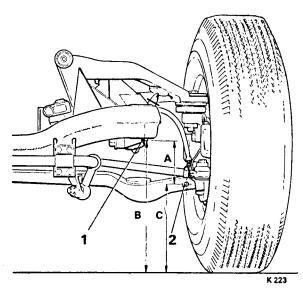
FRONT CAR HEIGHT CHECKING POINTS
